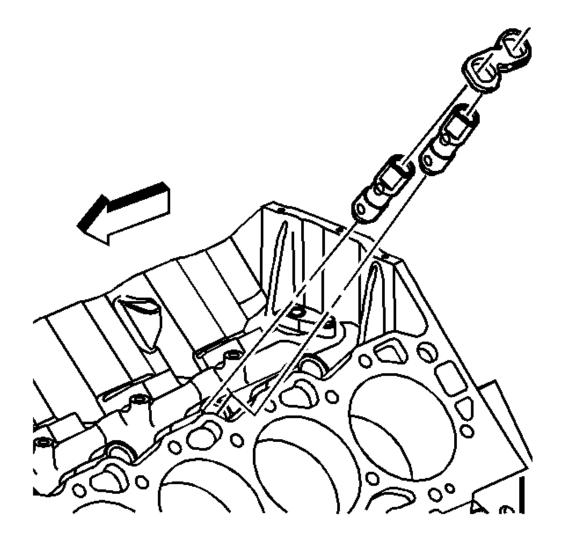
View Of Valve Lifter Guide Retainer & Bolts Courtesy of GENERAL MOTORS CORP.
